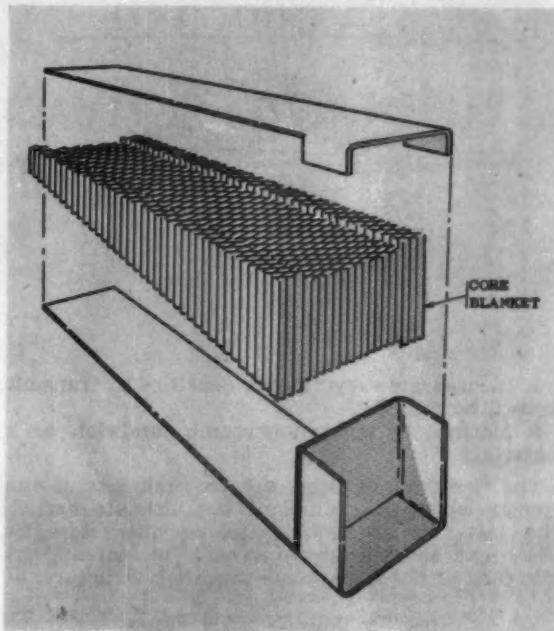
Possible solution to spar configuration problem. Spar caps or doublers are formed at the inboard ends to provide a receptacle for later insertion of forged fitting. Core blanket can be attached to back face of fitting pocket before brazing to insure shear transmission through the fitting.
